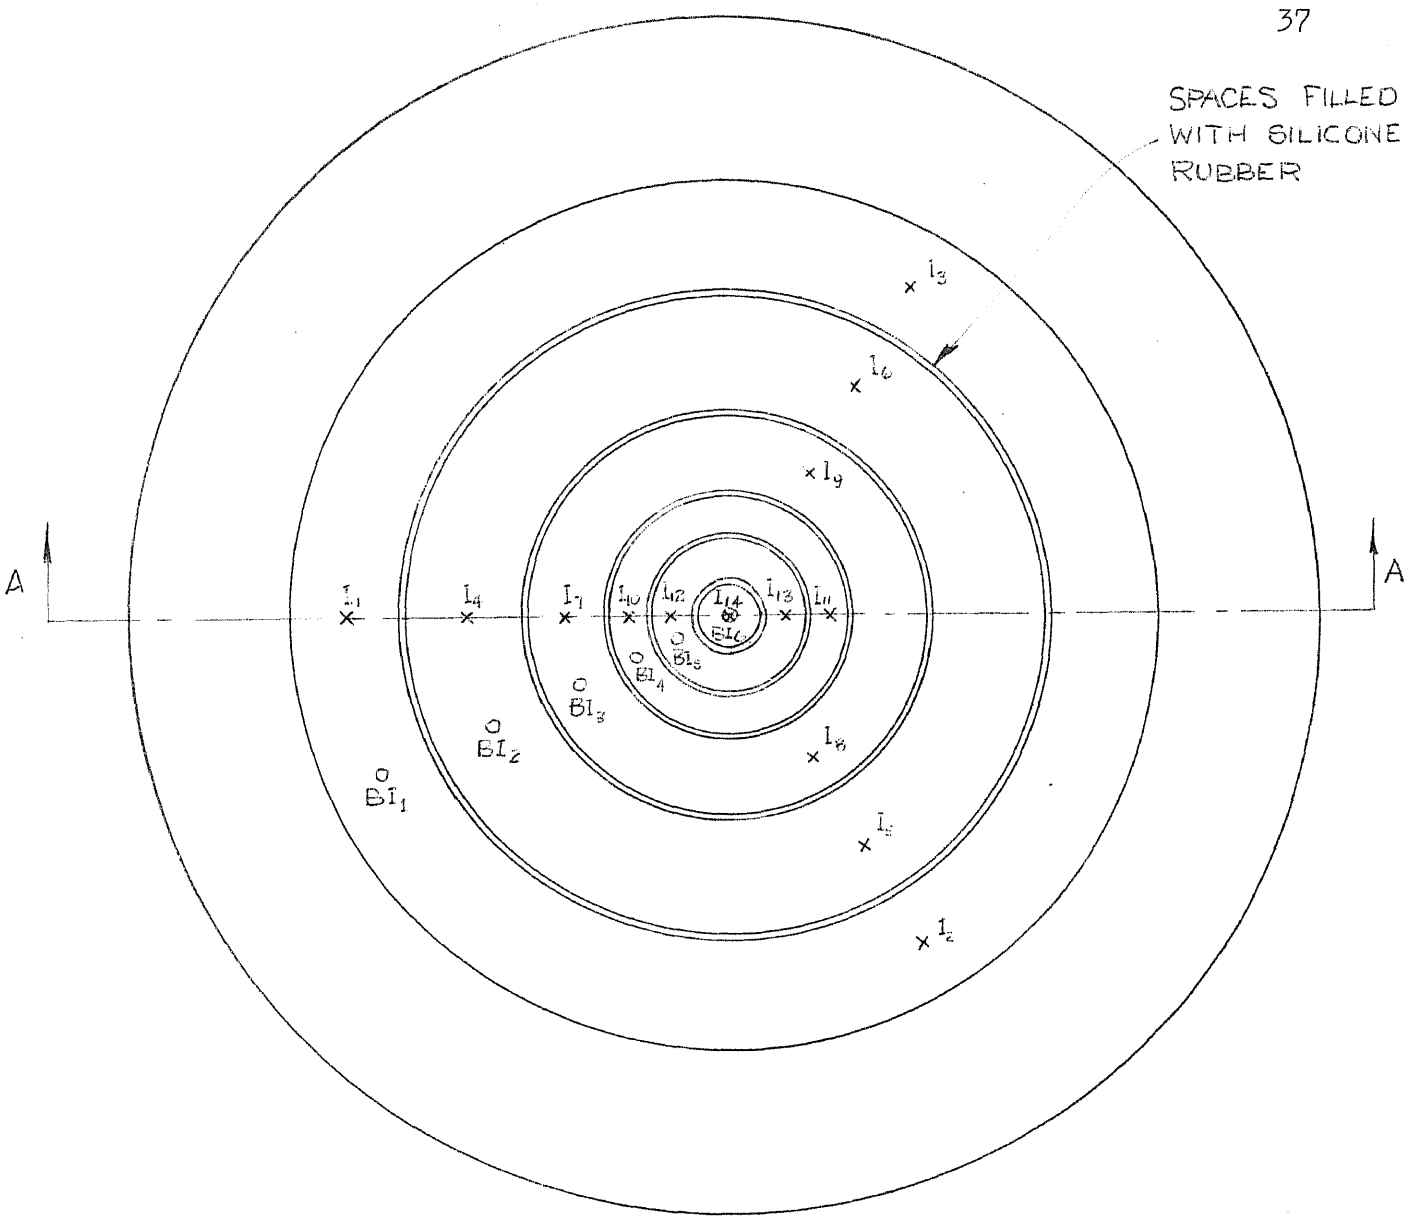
HEATED FLAT PLATE ASSEMBLY
